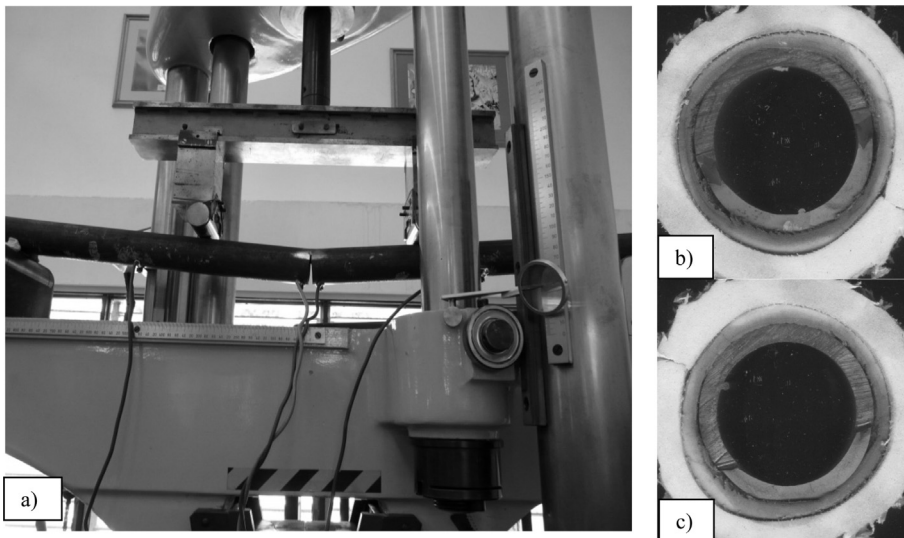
(a) Precracked coiled tubing fracture test. (b) Precracked coiled tubing fracture surface. (c) Blunt notched coiled tubing fracture surface.
